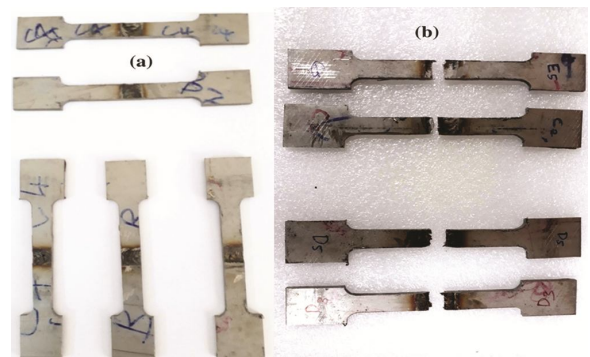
Tensile sample (a) before testing and (b) after testing
